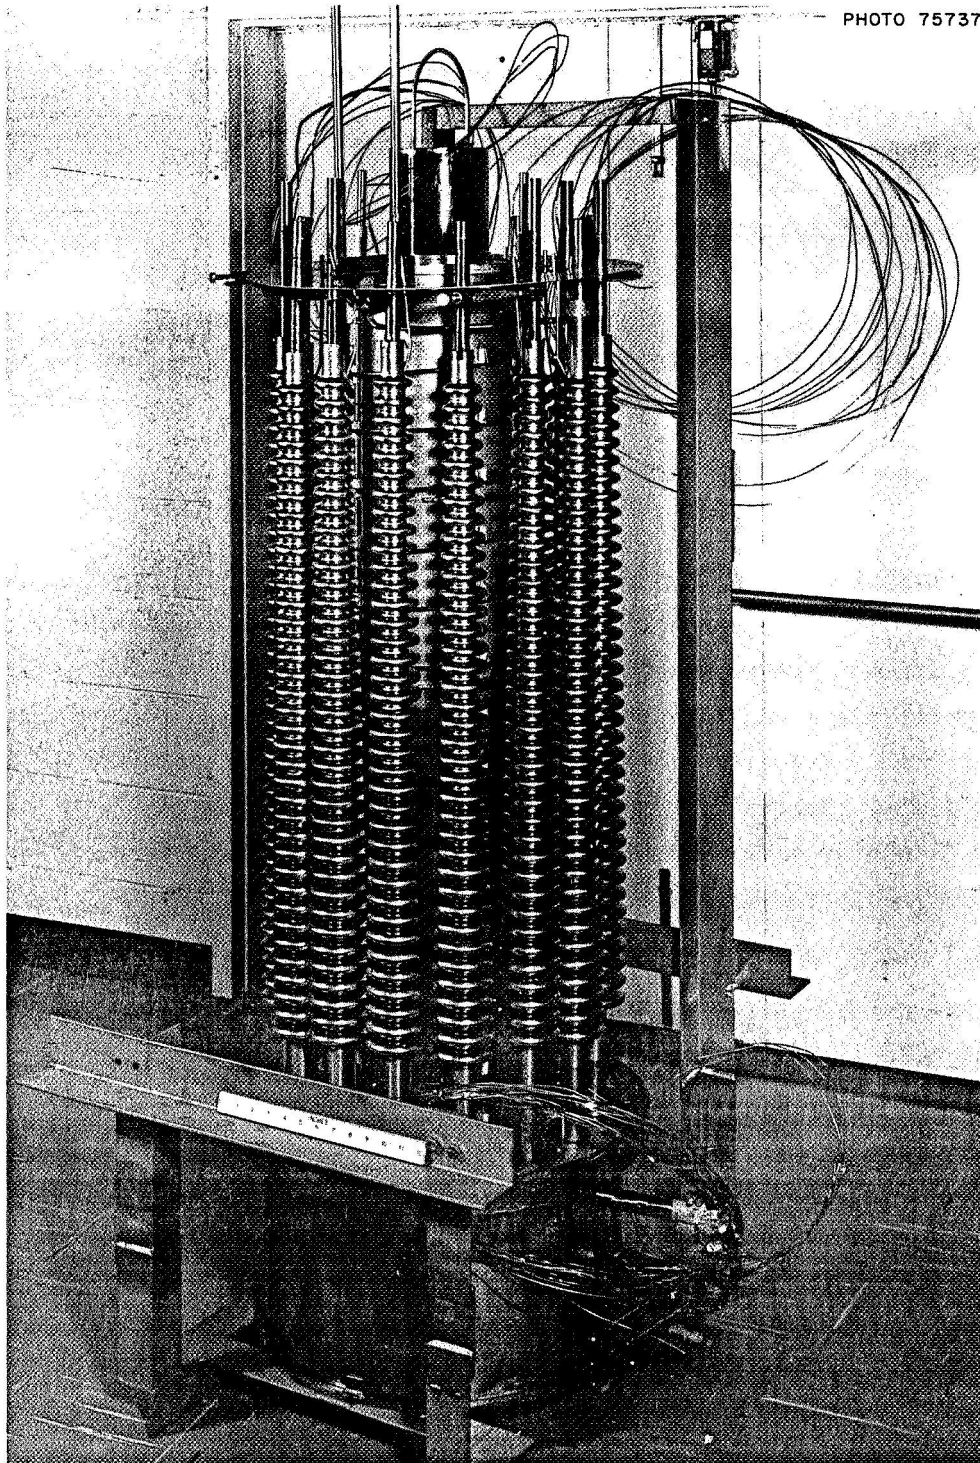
Heat Storage Tubes in Assembly Fixture.
